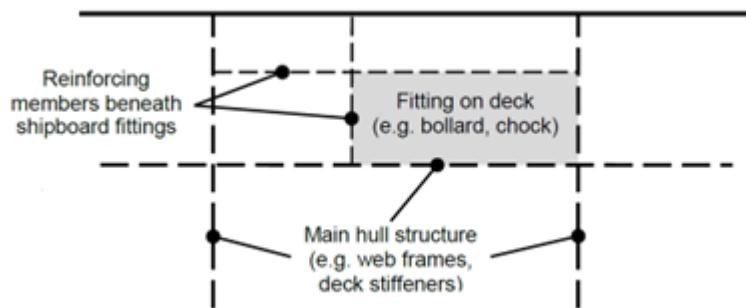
Sample arrangement of reinforced members beneath shipboard fittings
